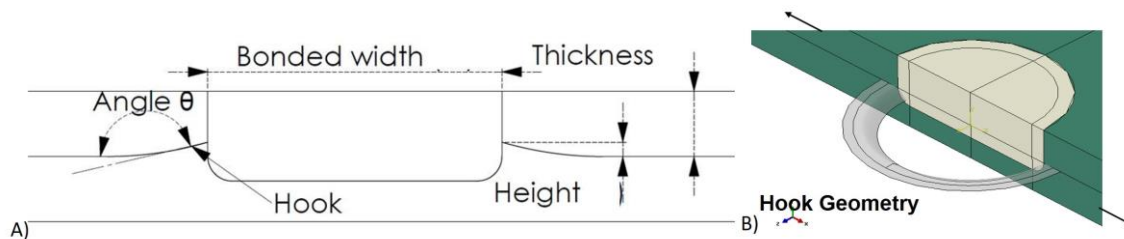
A) Schematic hook profile measurement: bonded width; B) A downwards hook placed in the hook location as a crack.
